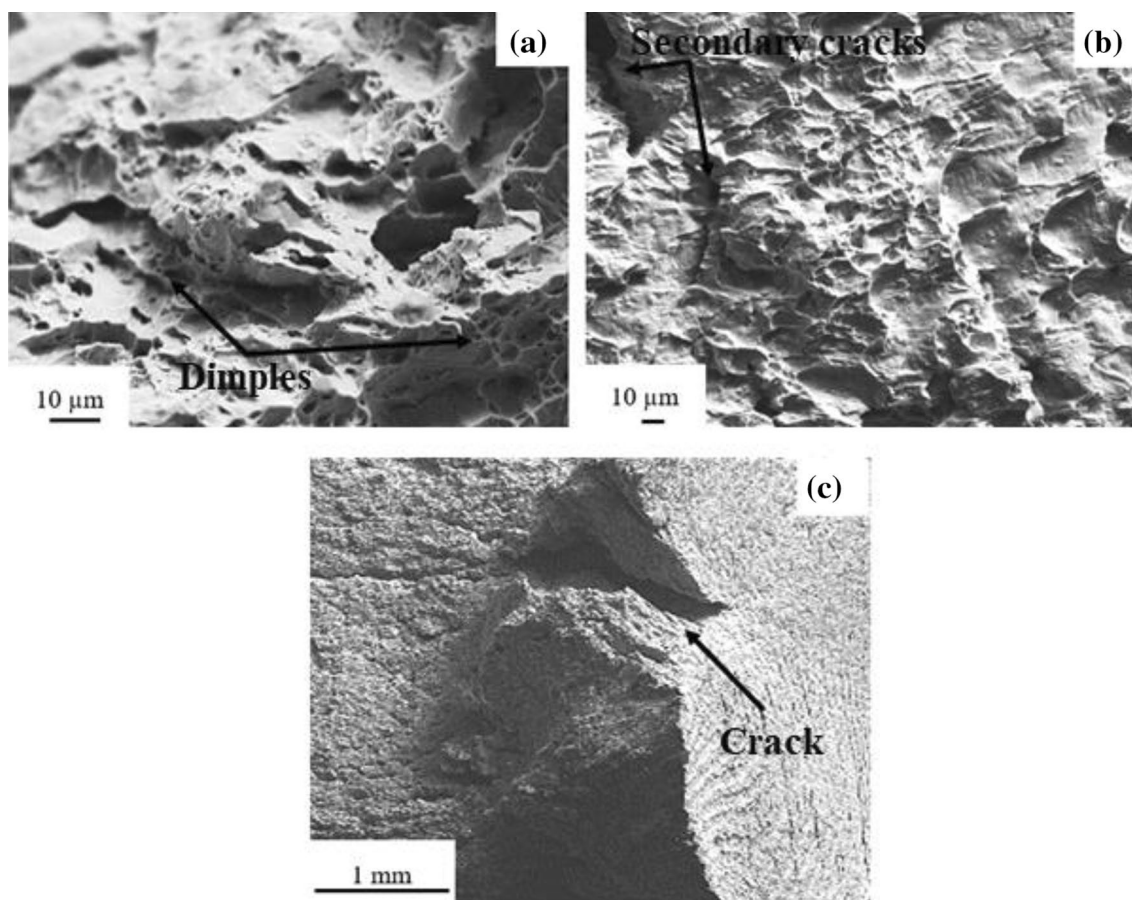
Fracture surface morphology showing ductile behavior, a dimples, b secondary cracks, and c a crack
